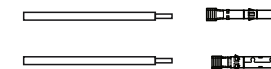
Insert the Wire into the Connector Cap nut and contact pin
